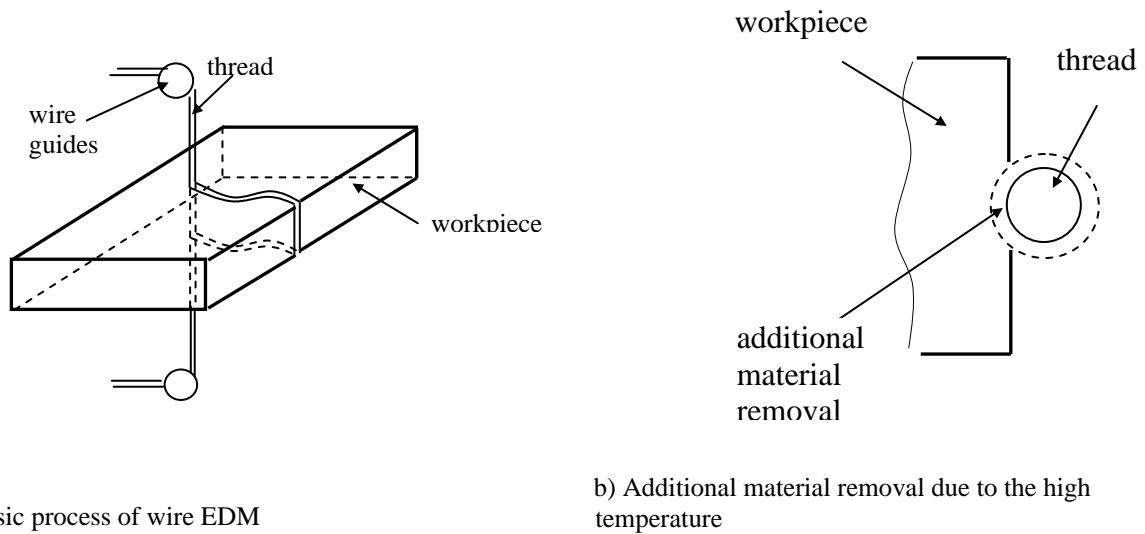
Schematic illustration of the wire Electrical-Discharge Machining process.
